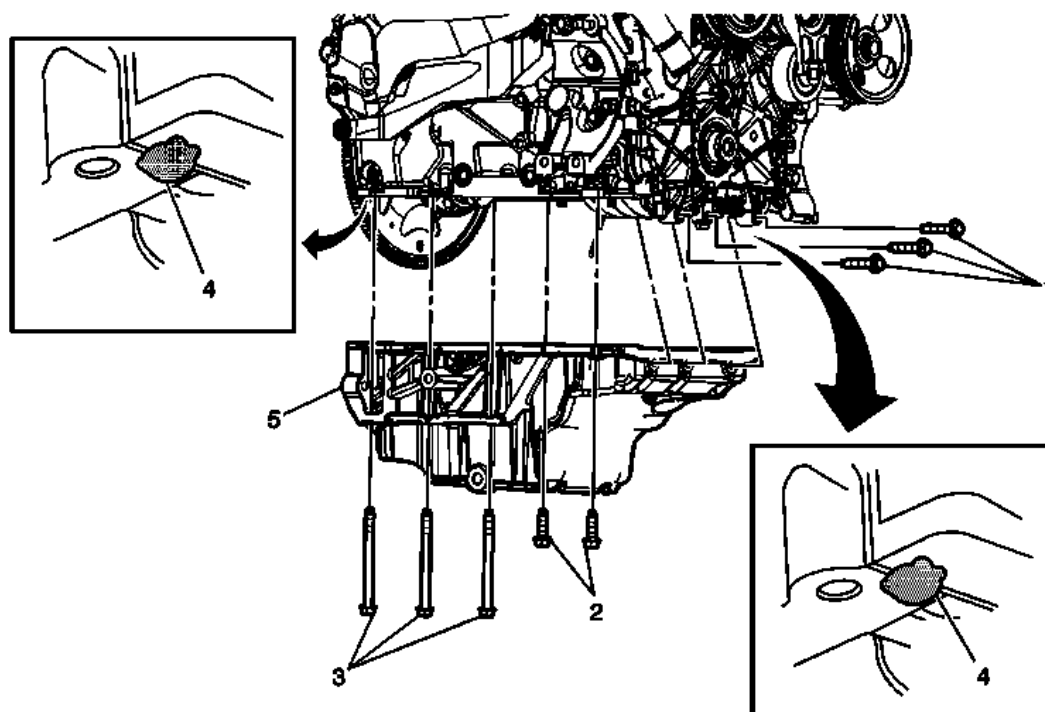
Engine Oil Pan, Sealant And Fasteners
